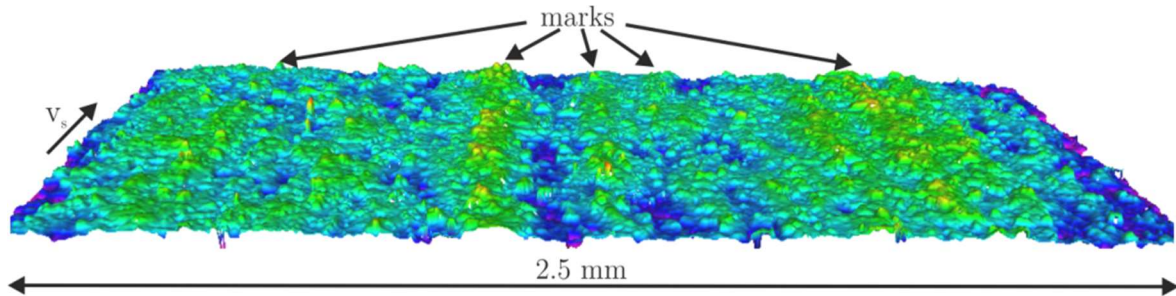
Grinding wheel surface after WEDD with a free stretched wire
